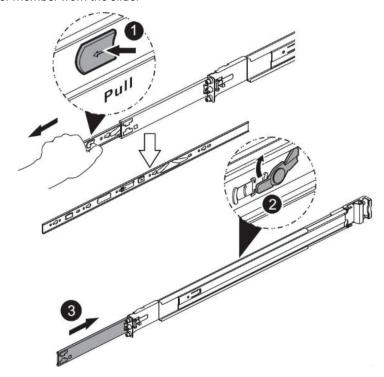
MOUNTING BOXILLA STEP 1
